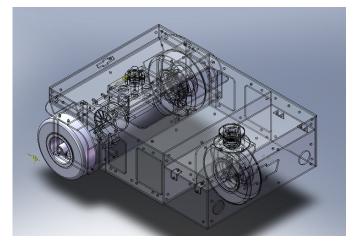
Assembly Drawing of GM Thailand's Prototype (Santirakyothin, 2011)
